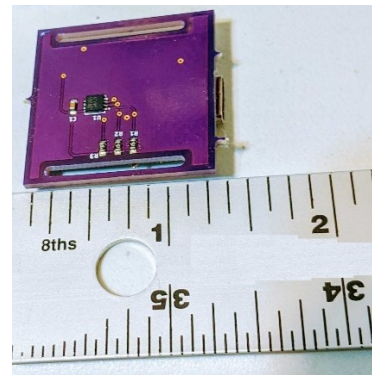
Fabricated Prototype PCBA for low-cost contact thermometer (bottom view).
